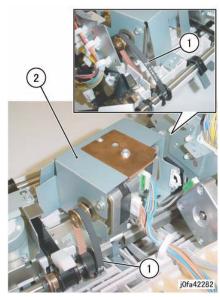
Removing the Eject/Set Clamp Motor Assembly
